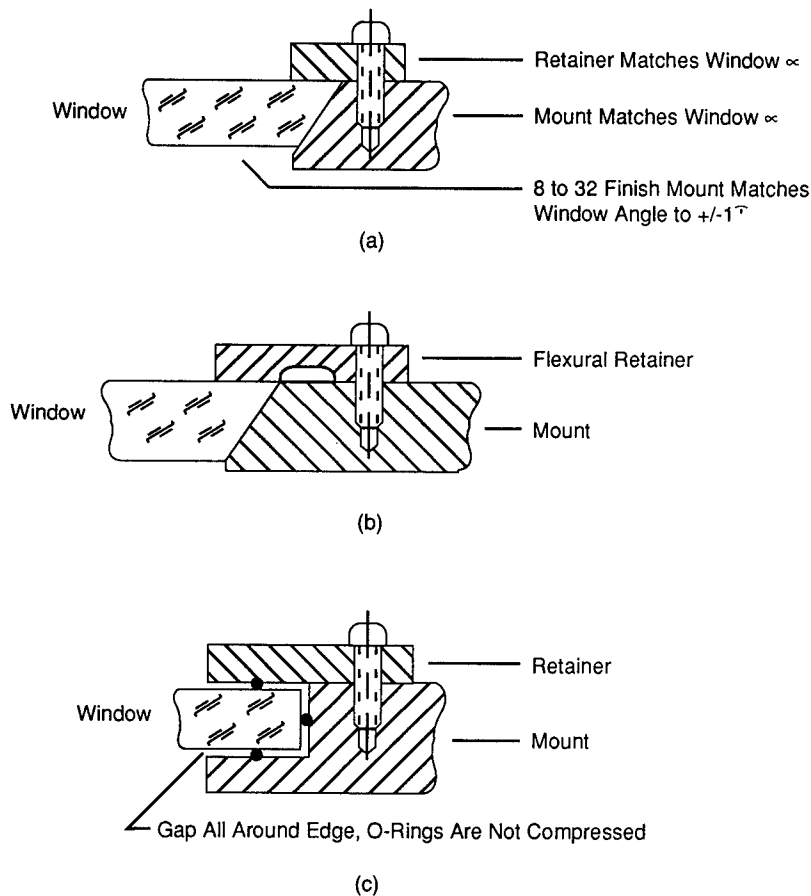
Typical window mounts: (a) hard mount, (b) athermal hard mount, and (c) O-ring mount.
